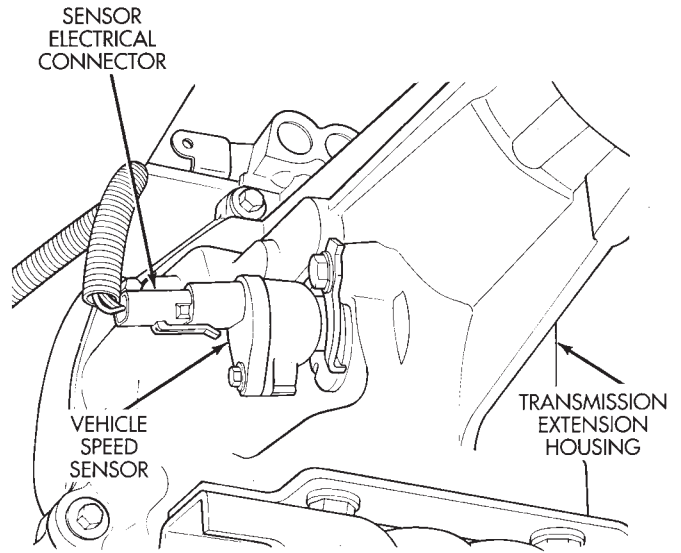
Vehicle Speed Sensor Location—2 Wheel Drive
